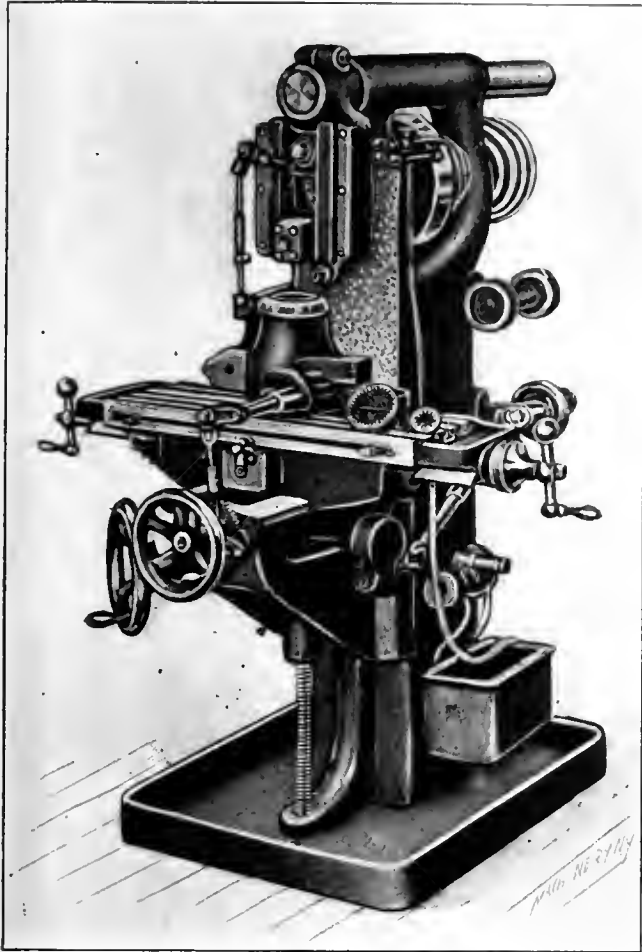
Slotting Attachment to Milling Machine for Cutting Internal Gears in Quantities
